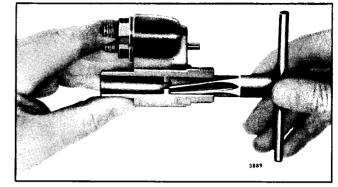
· Cleaning Injector Body Ring using Tool J 21089
